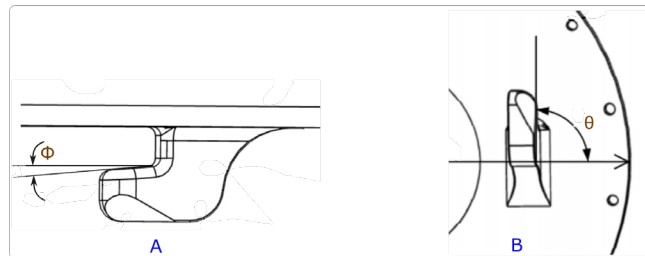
Wedge-hook locking geometry: (A) 15° lateral taper (ϕ) for wear compensation and (B) rotational locking engagement (θ)
